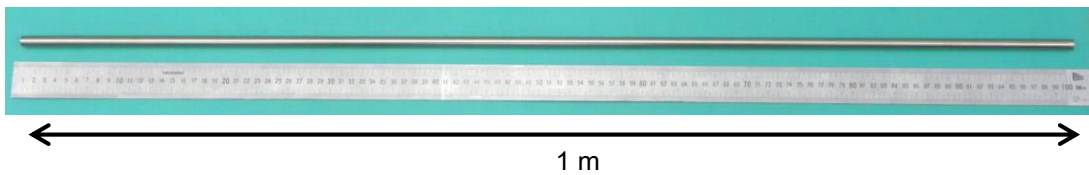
Overview of fabricated 10x10 type FeCrAl-ODS tube material
